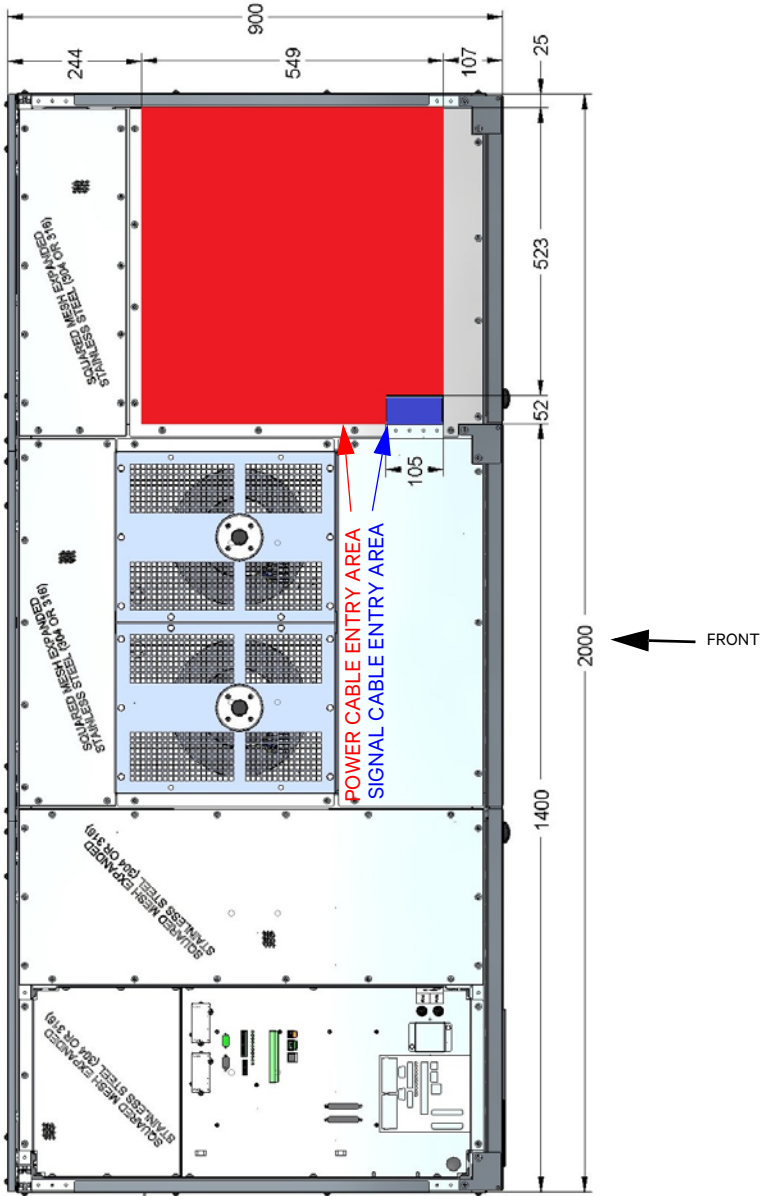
Liebert EXL S1 600/800kVA upper view (gland plate)
